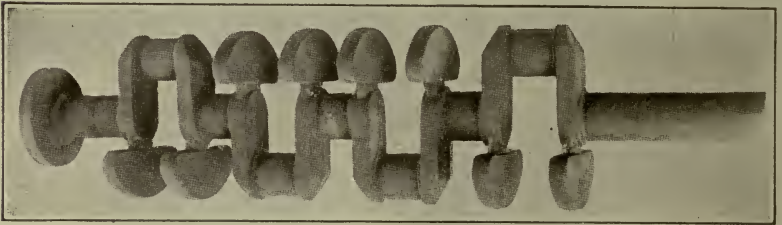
Five Bearing, Four Throw, Counterbalanced Crank Shaft.
